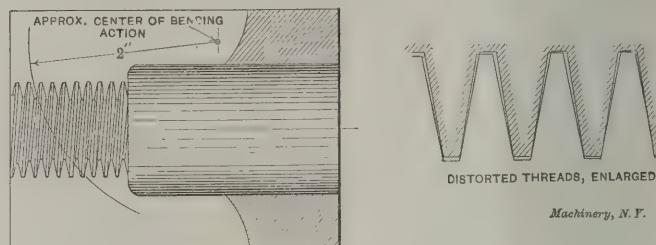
Spring Screw Die with Special Threads, and Threads Distorted by Common Adjusting Method.
